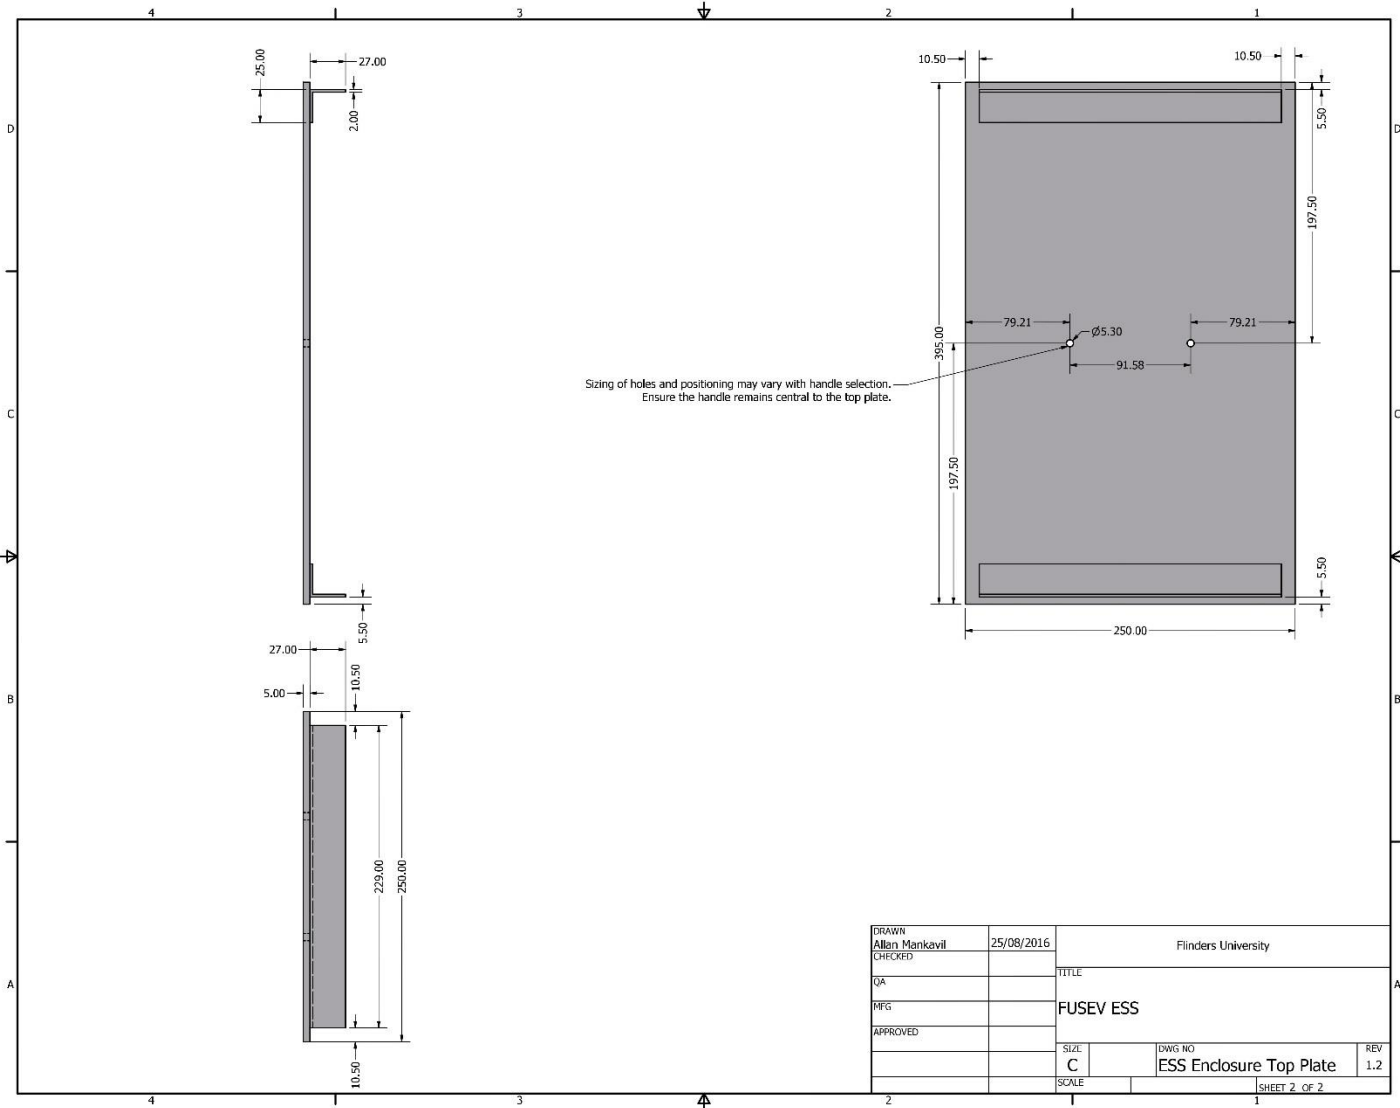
The mechanical drawing of the ESS Enclosure's Top Plate.
